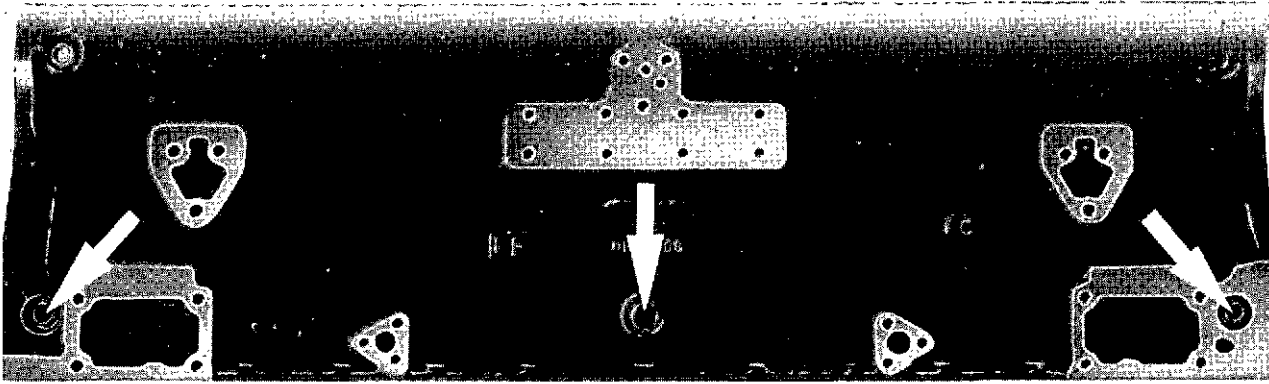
Main bearing lateral bolts, both sides of crankcase
